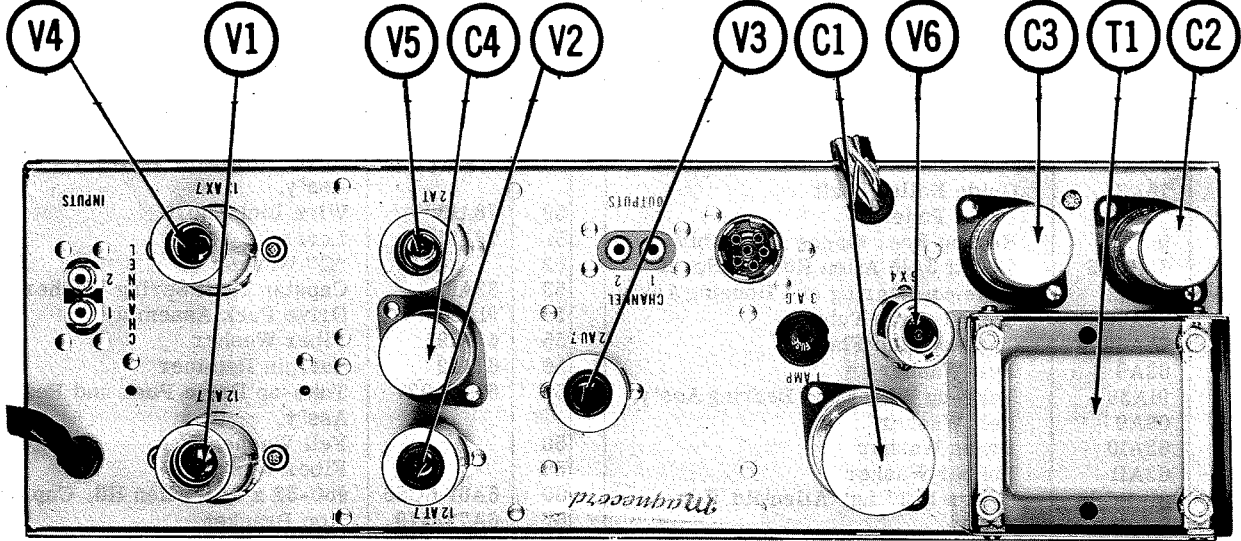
A EXPLODED VIEW OF PARTS ABOVE FRONT PANEL
